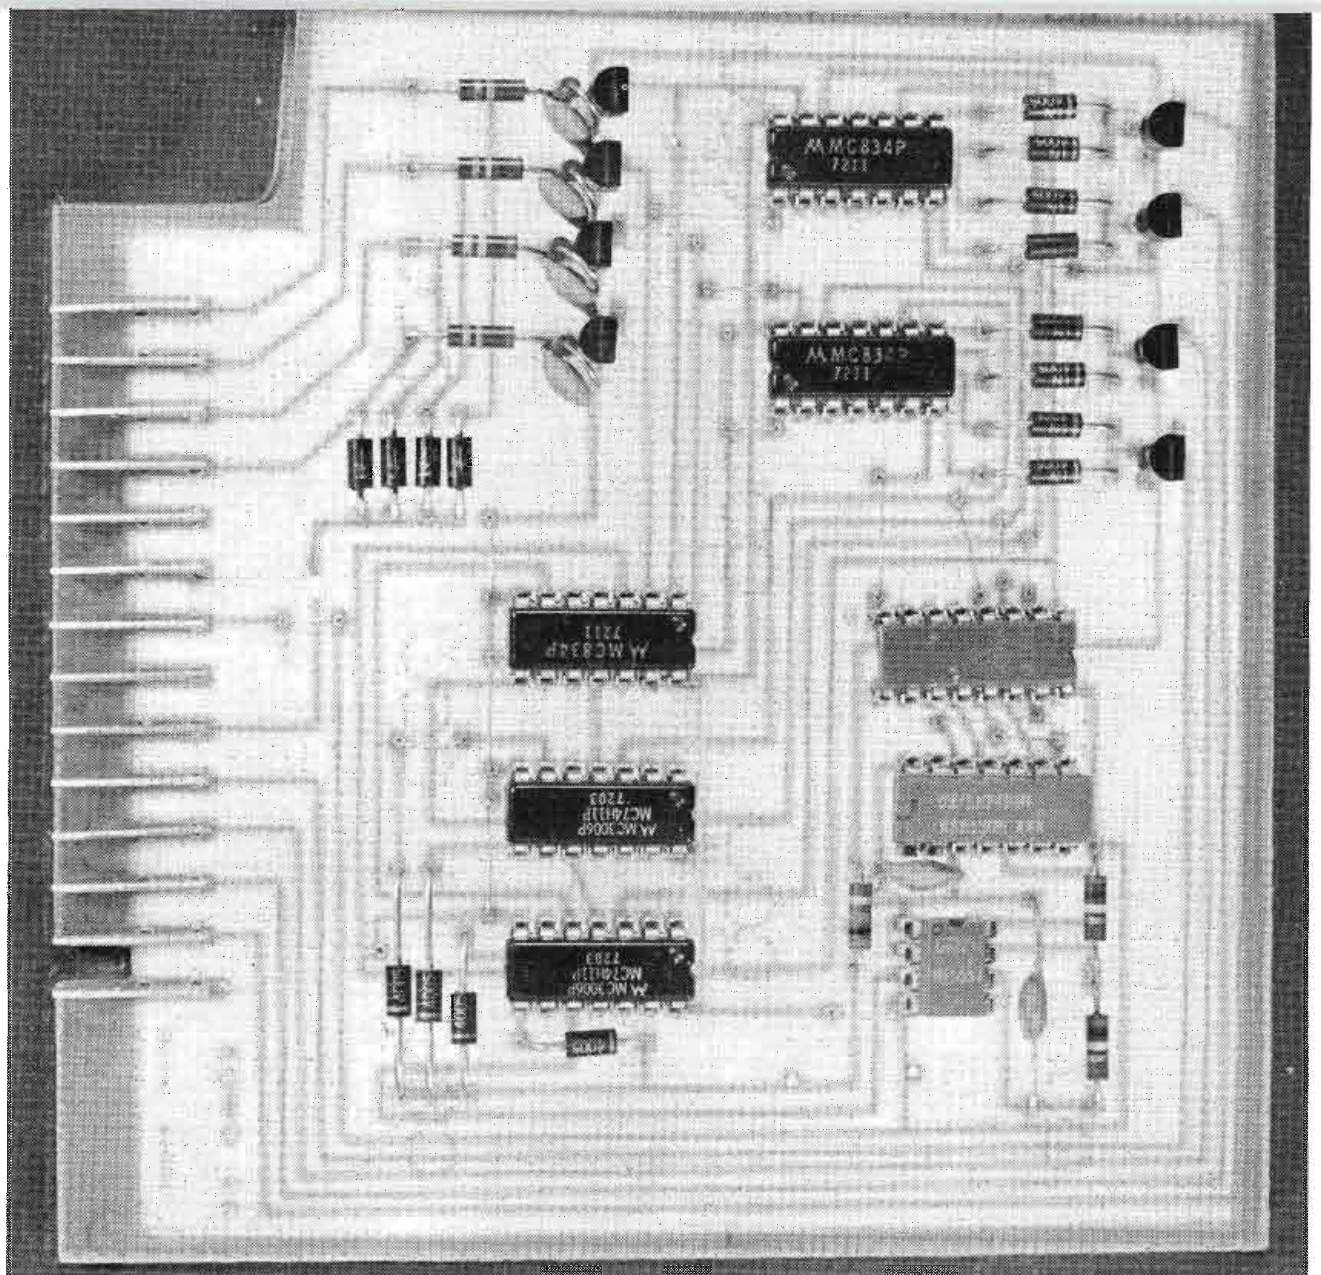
Board layout of parts. Note the NE555V clock in the lower righthand corner. This corner layout is represented in Figure 3.
